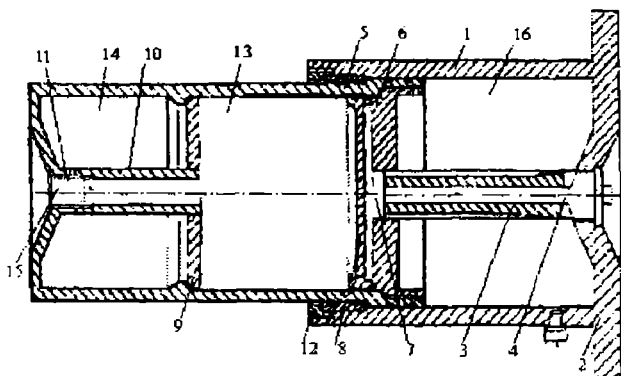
Section of a draft gear with the variable gas quantity in the working chamber
